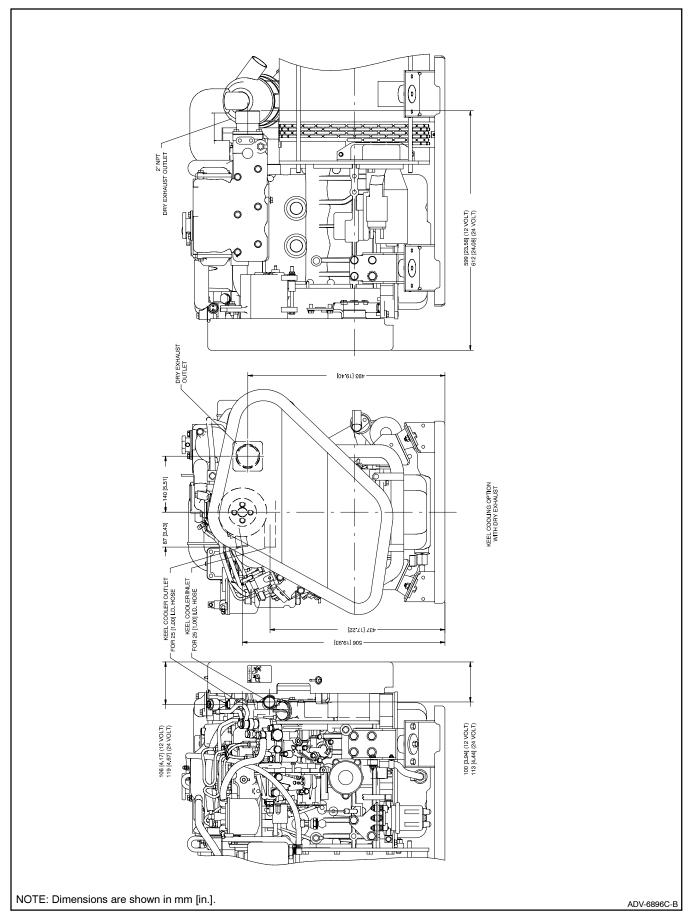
Dimension Drawing, 13EOZD and 11EFOZD with Keel Cooling
